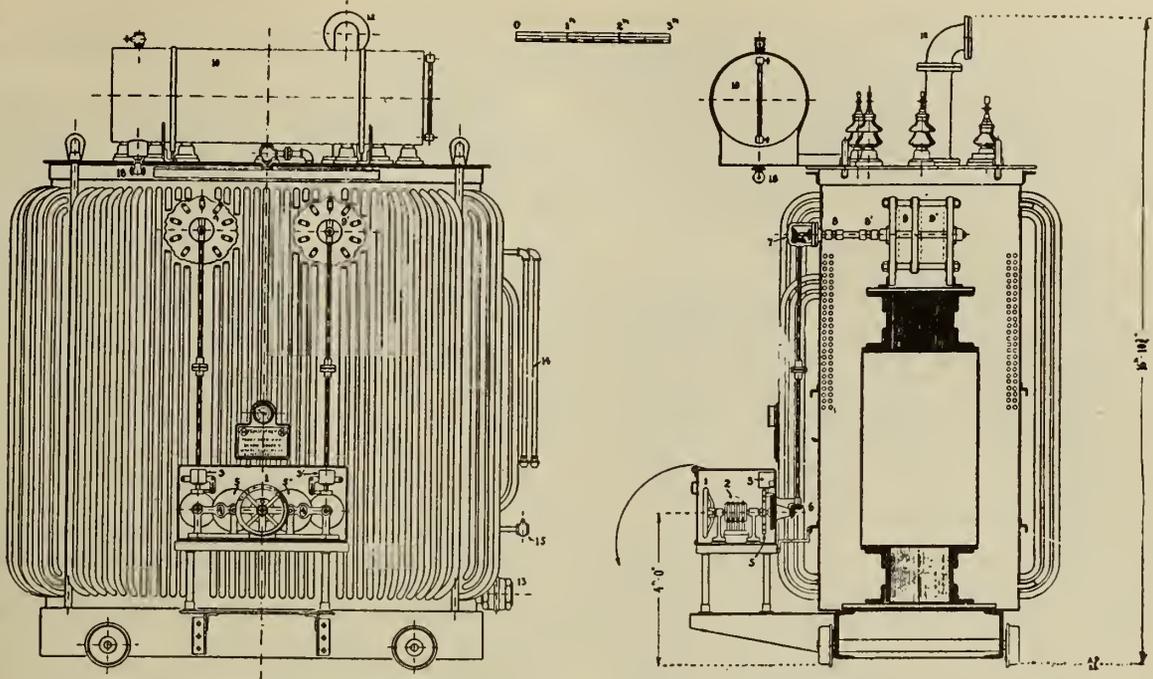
Arrangement of Tap Switching Mechanism when Installed on Transformer.
